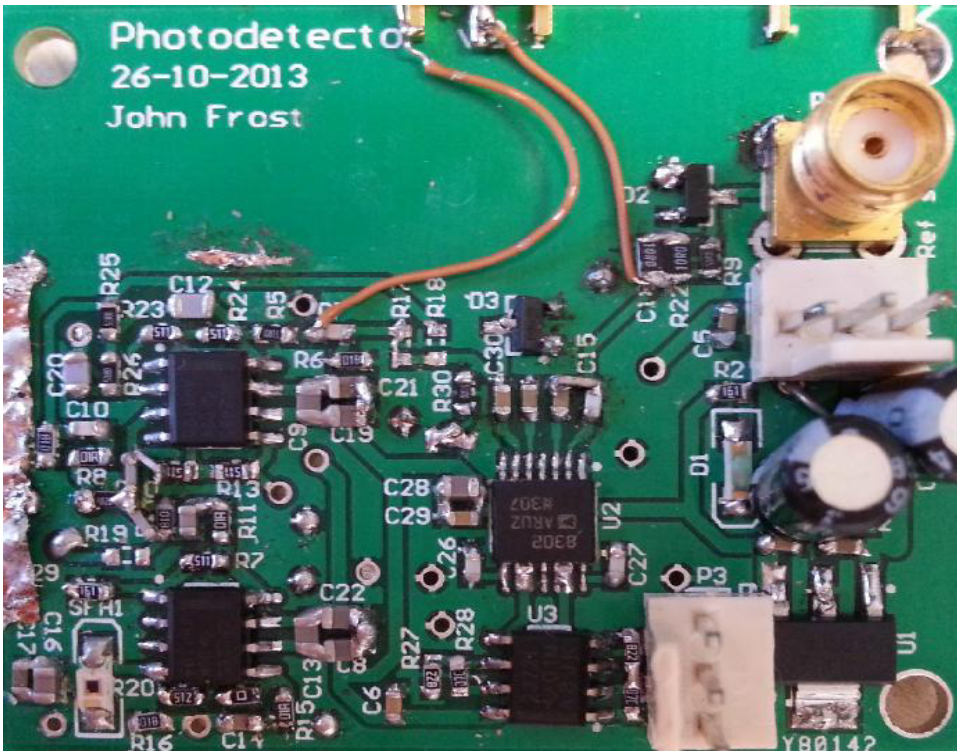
Showing a photograph of the top side of the final photo sensor and phase detector circuit PCB after assembly.
